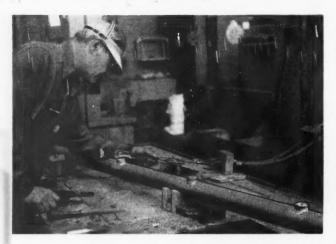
Using a Barnes horizontal gun drilling machine, a one-half inch hole is drilled lengthwise through the web of the connecting rod.
